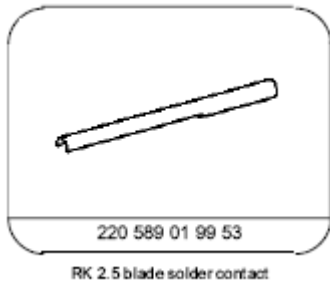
Identifying RK 2.5 Blade Solder Contact (220 589 01 99 53)
